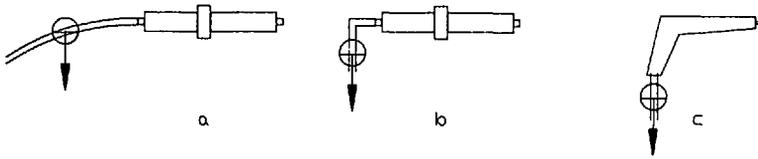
Twisting of the tool out of the hand by the air line, a, can be reduced by use of a right-angle attachment, b, or by using a pistol-shaped tool, c.
